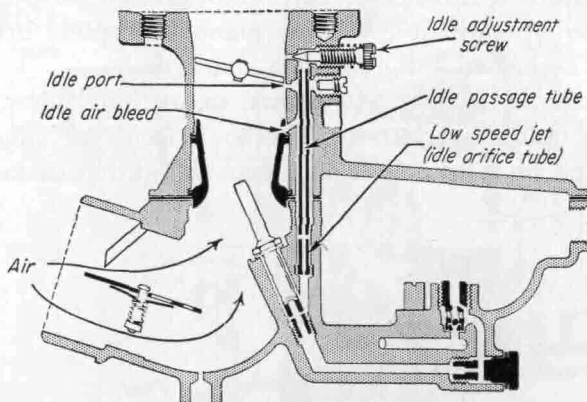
Idle circuit in updraft carburetor. (Carter)
